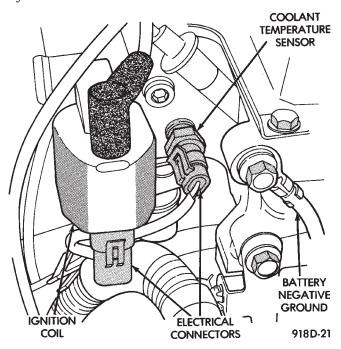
Coolant Temperature Sensor—2.5L TBI Engines
